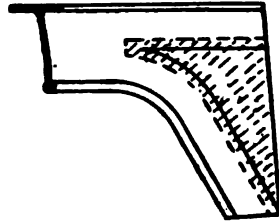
Butterfly Bulb Welded Knee.
